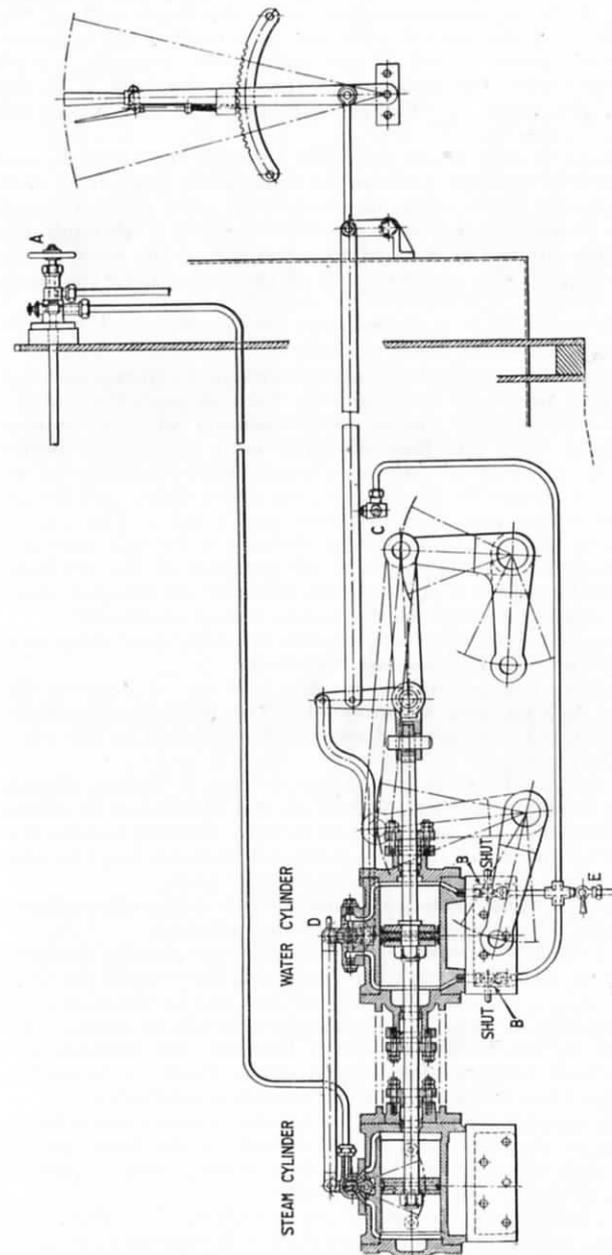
DETAILS OF STEAM-OPERATED REVERSING GEAR FOR 0-8-4 TYPE SHUNTING ENGINES, L.N.E.R. (GREAT CENTRAL SECTION).
